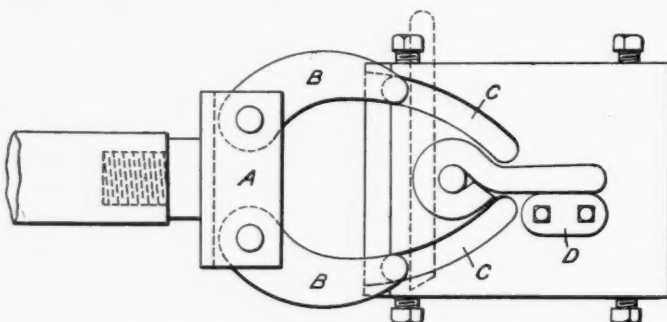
Tool for Bending Eye-Bolts. Perritt.
